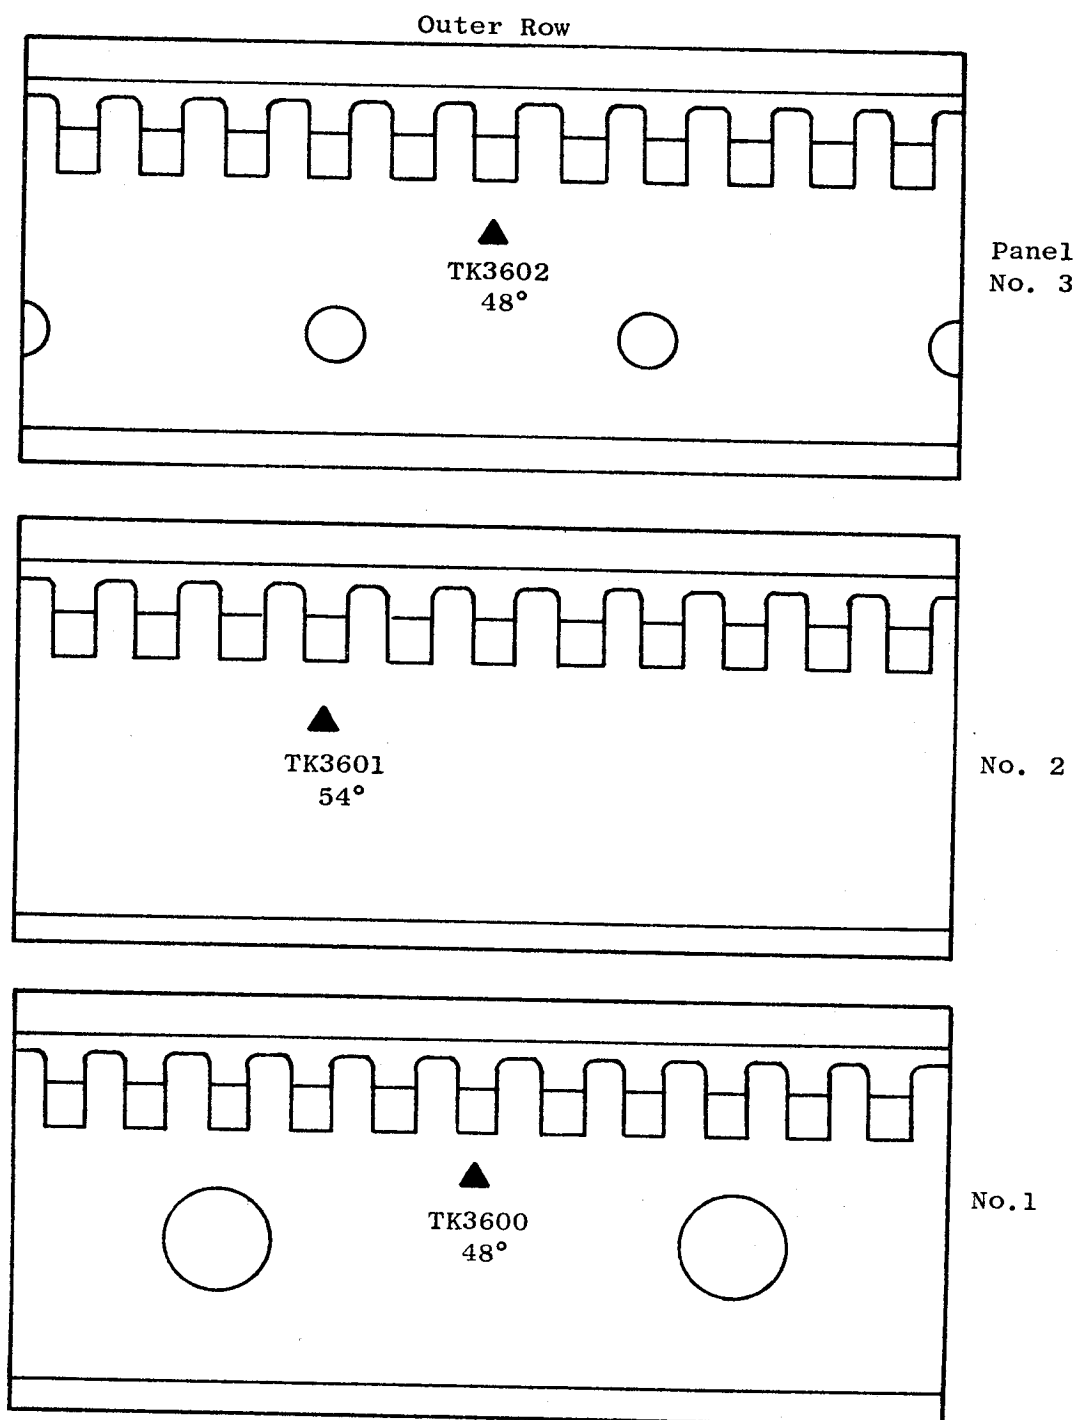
Combustor Liner Thermocouple Location, Outer Liner Shingles.
